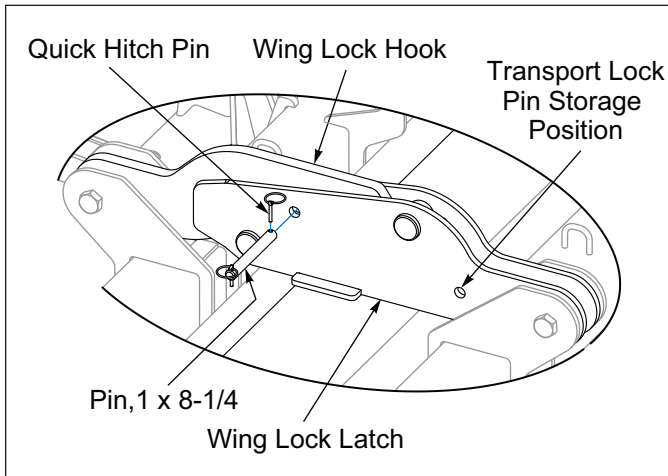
Wing Fold Lock Transport Lock Engaged
